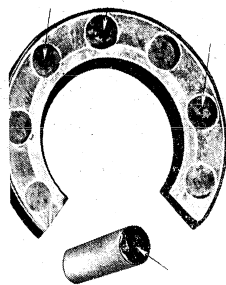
Corrosion of spherical surfaces of plungers and damage to the beveled plate of the plain-and-ball bearing.
